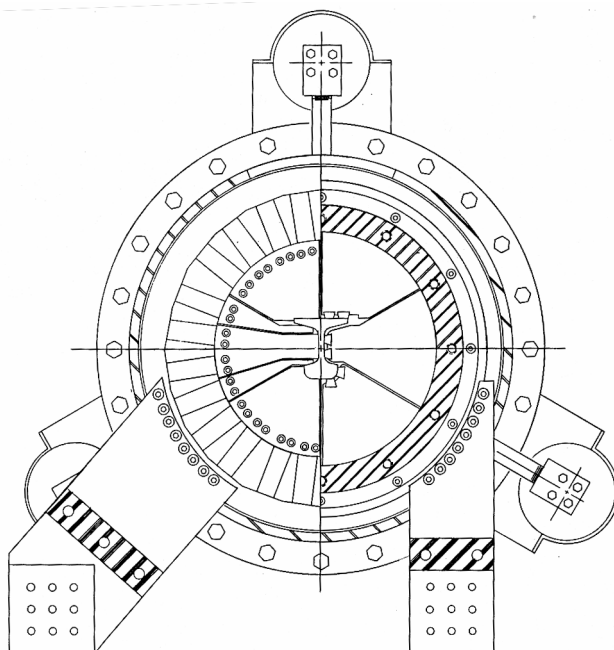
Transverse section of OIME, Inc., rail welding fixture
